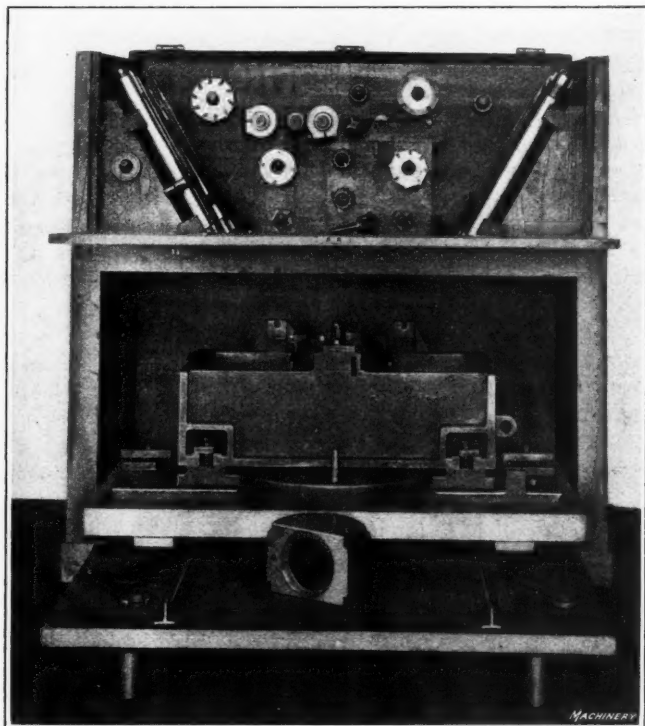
Portable Cabinet containing Jig and the Necessary Cutting Tools
